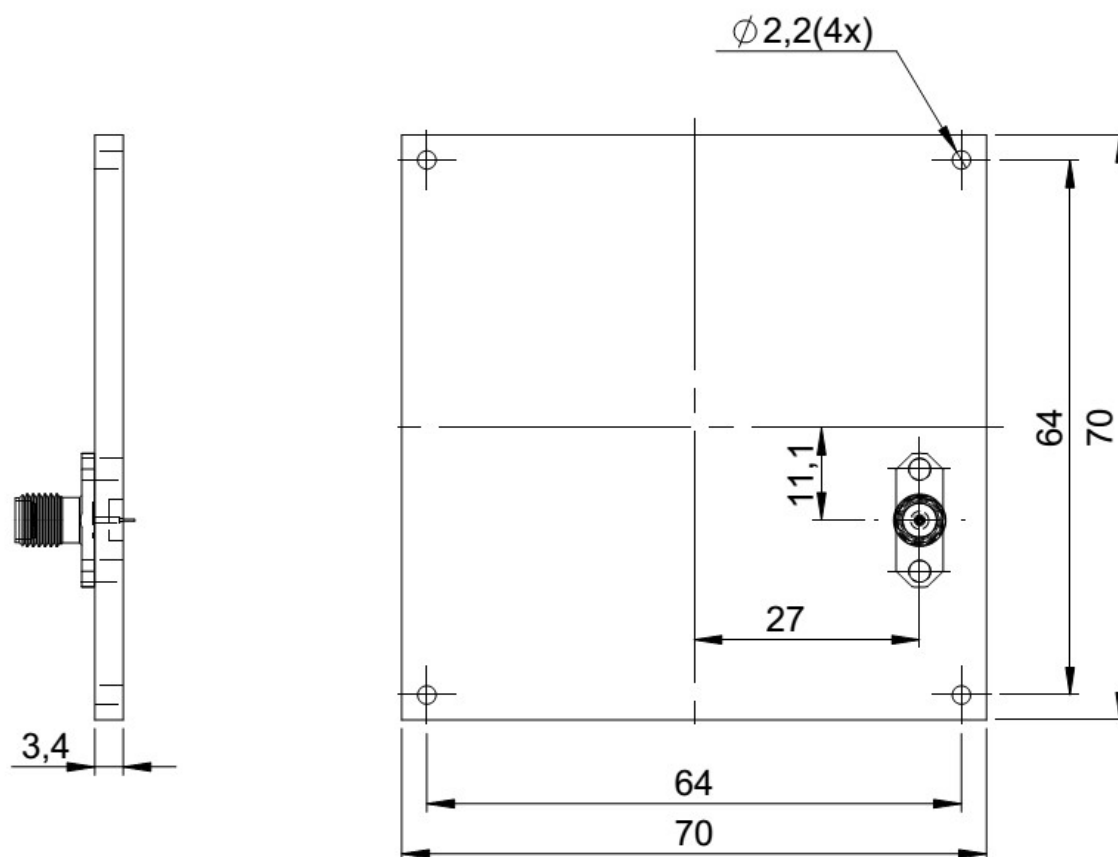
Mechanical dimensions and positions of RF connectors. All tolerances for all mechanical dimensions are $\pm 0.1\text{mm}$, for connector $\pm 0.5\text{mm}$ and high (z-dimension) $\pm 10\%$. These are based on manufacturing tolerances by the PCB manufacturer.
